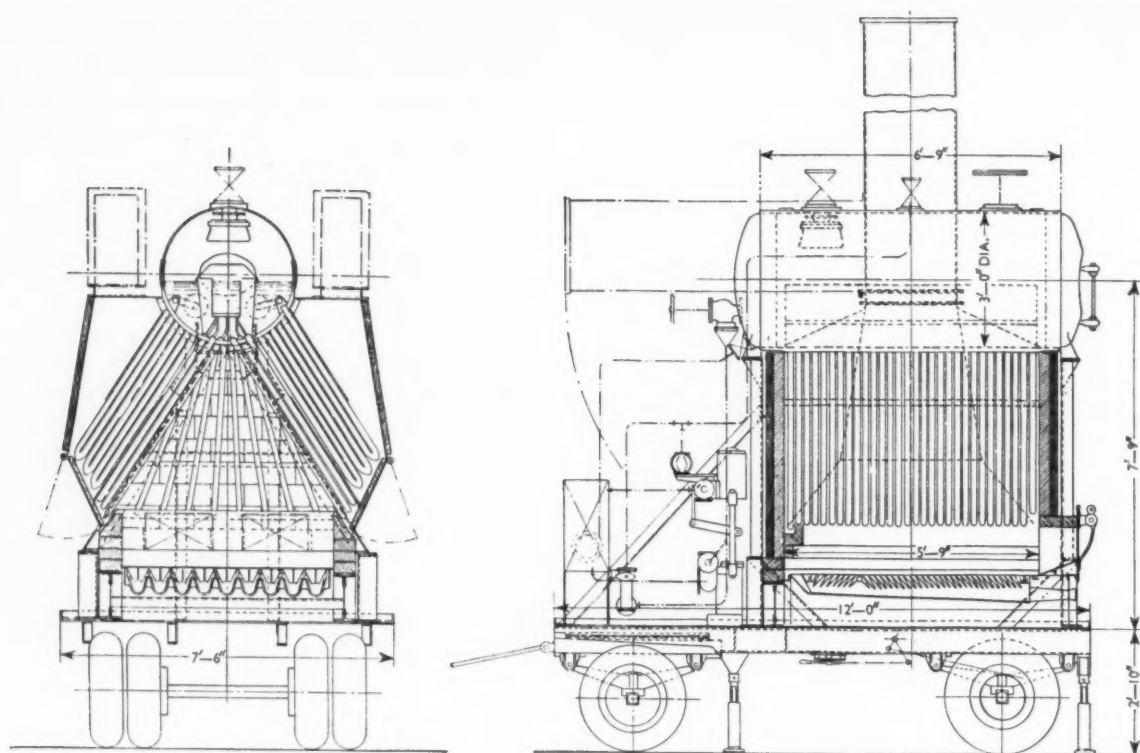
LEWIS MOBILE SINGLE-DRUM WATER-TUBE BOILER
